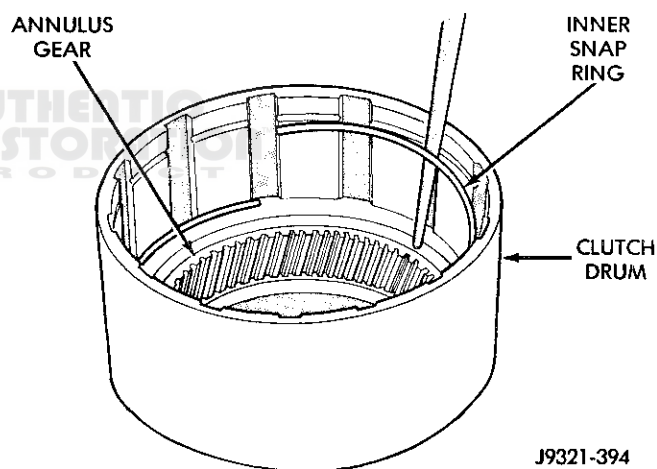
Clutch Drum Inner Retaining Ring Installation
